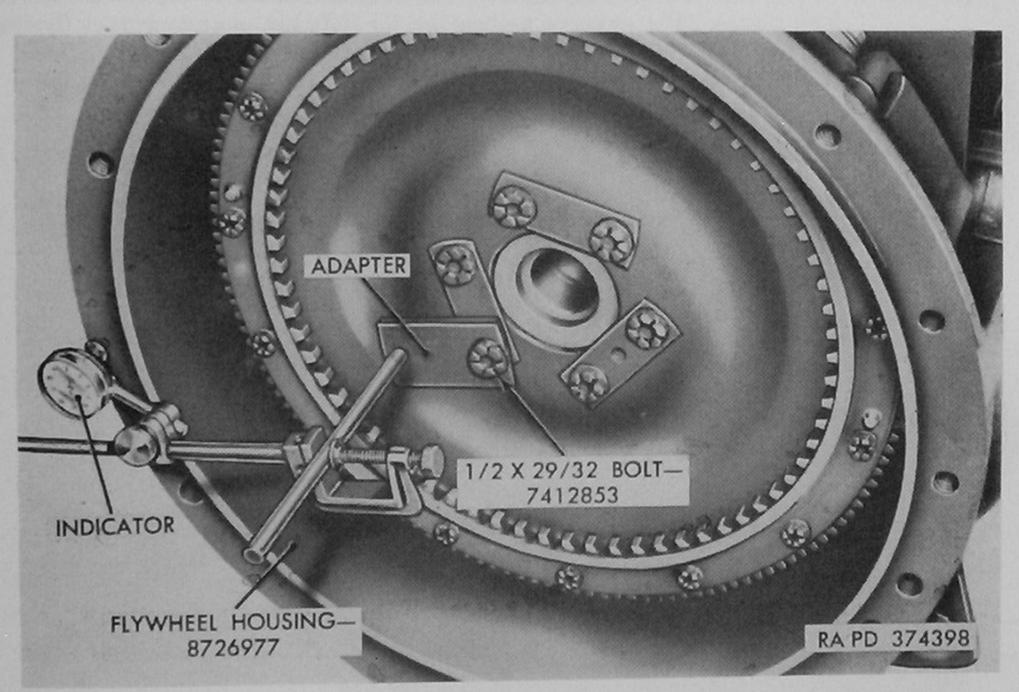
Checking squareness of rear face of flywheel housing—engine assembly 8726920.
